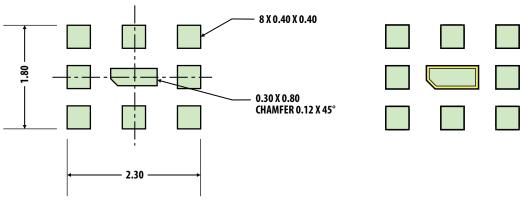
ACMD-7610 Foot Print Superposed on PCB Layout
